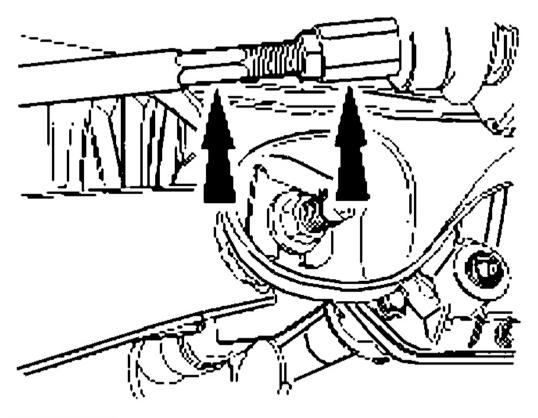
Rotating Toe Link Adjuster Courtesy of FORD MOTOR CO.
